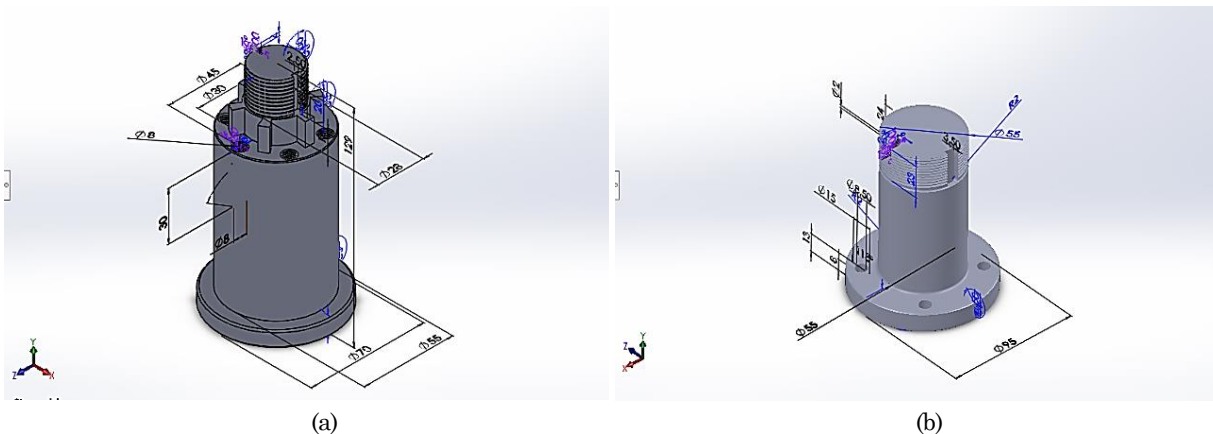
(a) Redesigned rotary shaft model 1, (b) redesigned rotary shaft Model 2
